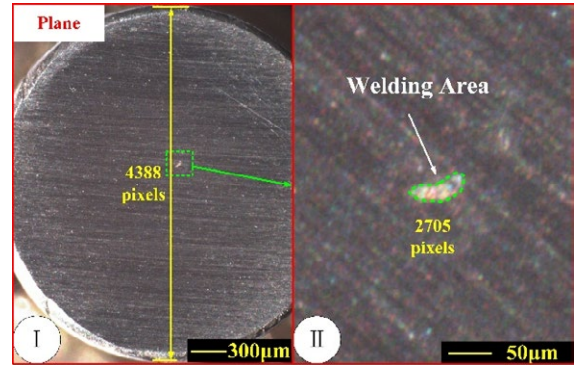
Photographs of contact obtained from CCD camera (Welding force: 328mN).
